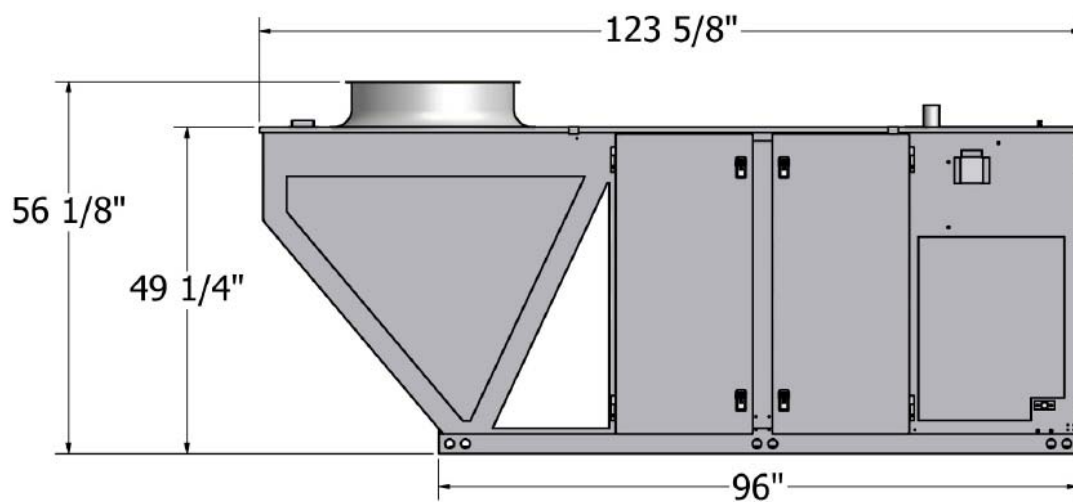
CAD drawing displaying the exterior dimensions of the Model 5 GHP.
